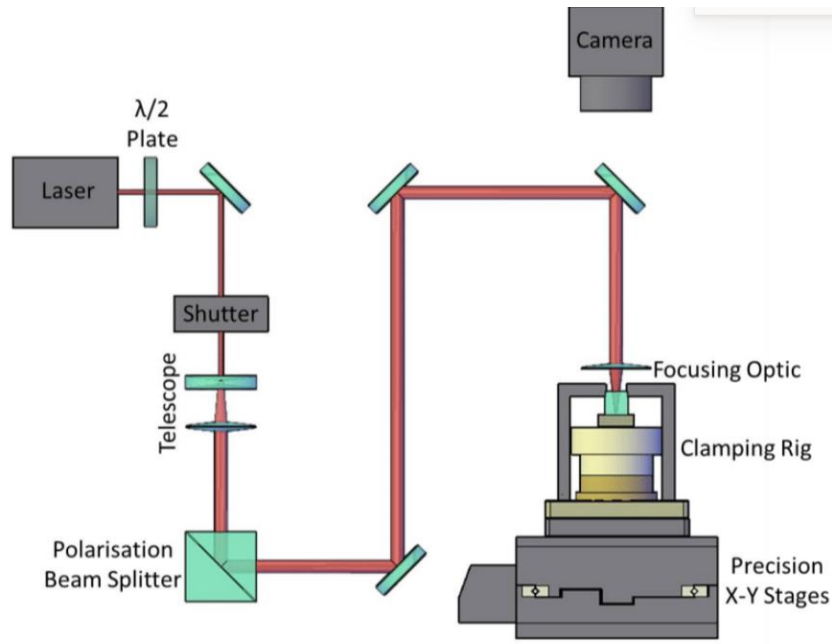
Schematic of laser welding system showing the optical beam path and clamping arrangement.
